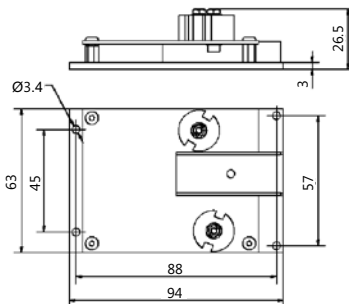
Outline drawing of DP-SP series drivers with conductive pad
